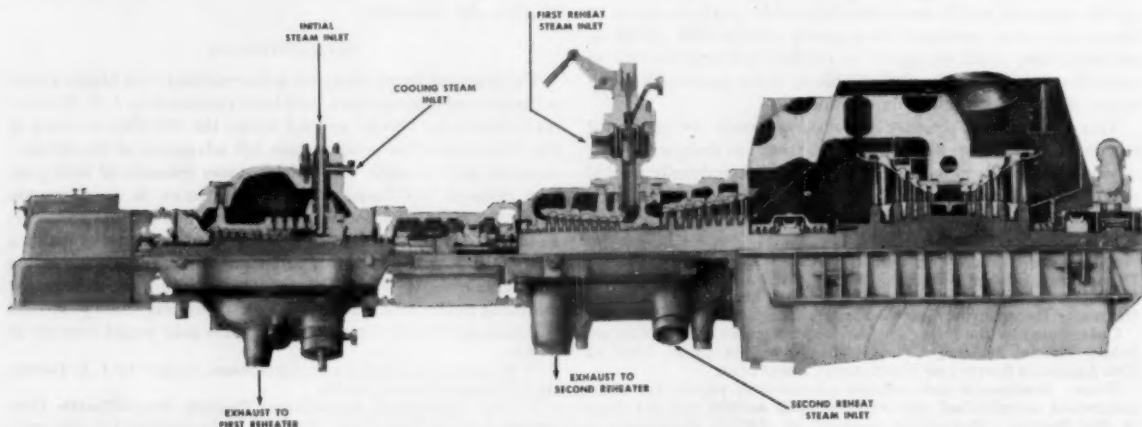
QUARTER SECTION OF ENTIRE TURBINE
